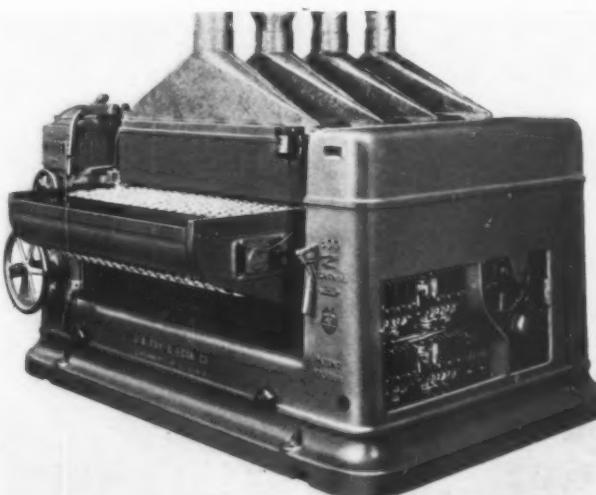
Motors, control equipment and push button stations built integral with structure of machine
